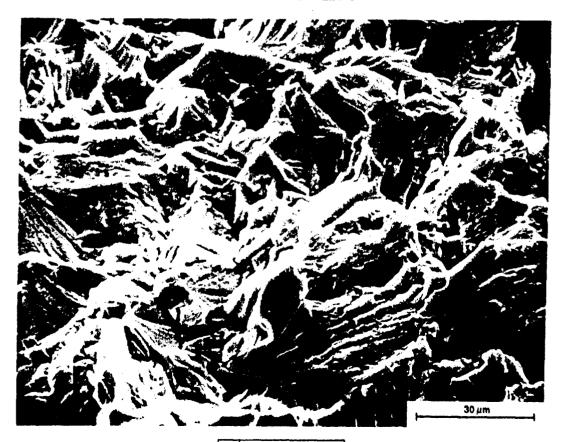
Macrofractographs of the compact tension specimens tested under constant amplitude loading
